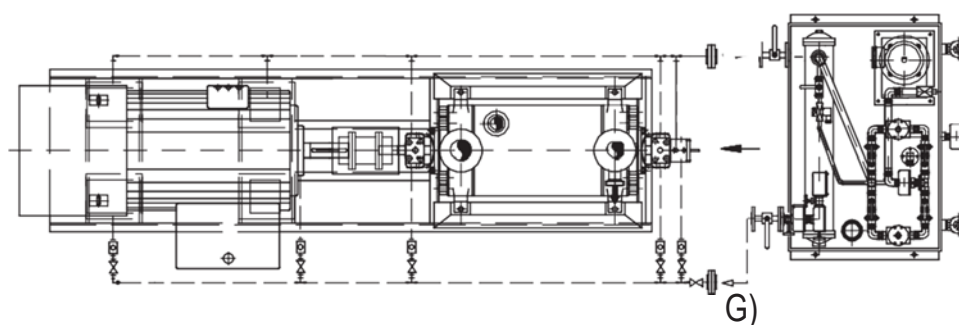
Lube oil system behind the pump, for lubrication of the pump bearings, or gearbox or electric motor
